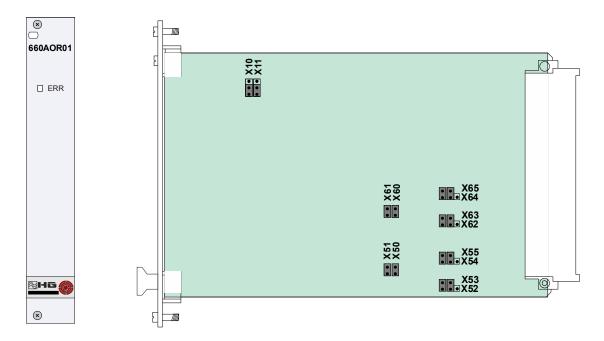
Front and side views of 660AOR01 card, showing jumper settings (20mA)
